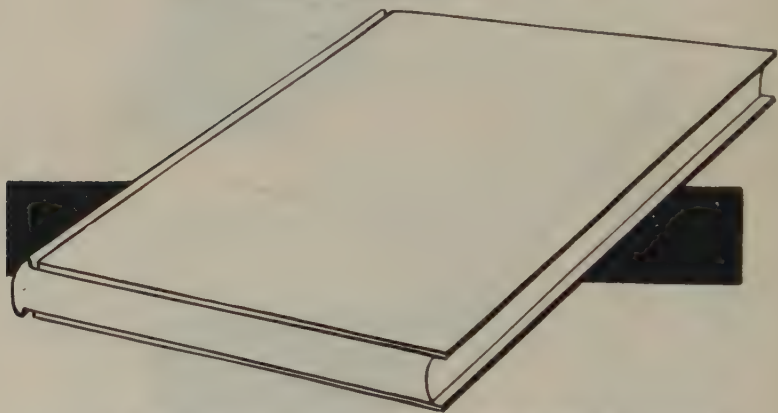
FITTING BOARDS TO BOOK FOR COVER MAKING
